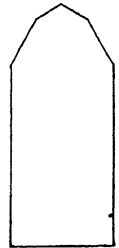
B.—Enlarged Sectional View of Agate Knife-edge before being mounted.
